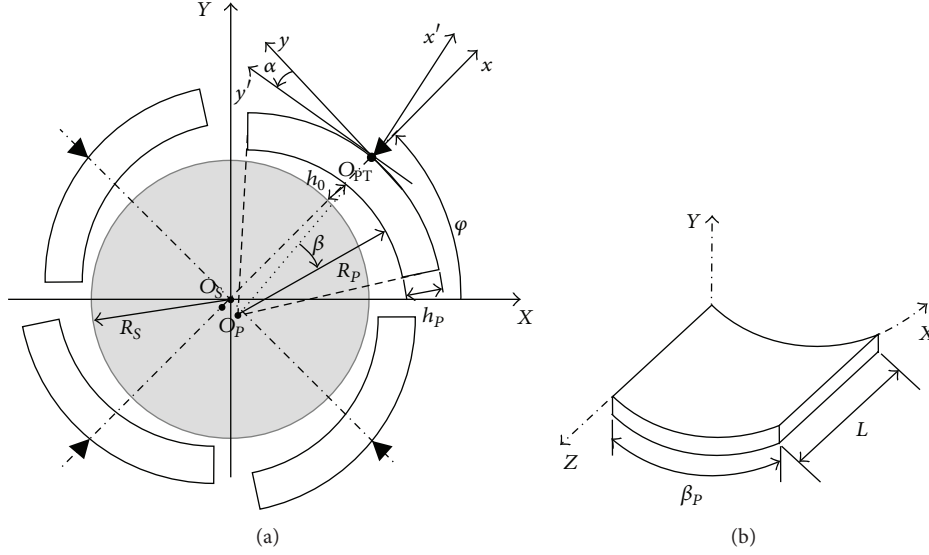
Schematic representation: (a) front view of the rotor bearing; (b) perspective view of the pad.
